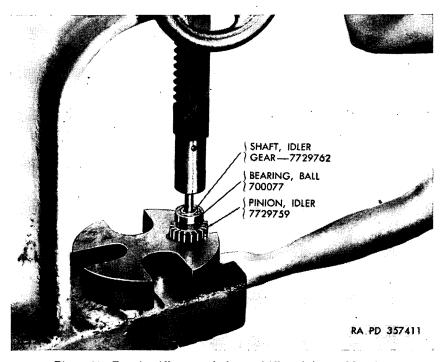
Pressing idler gear shaft out of idler pinion and bearing.
